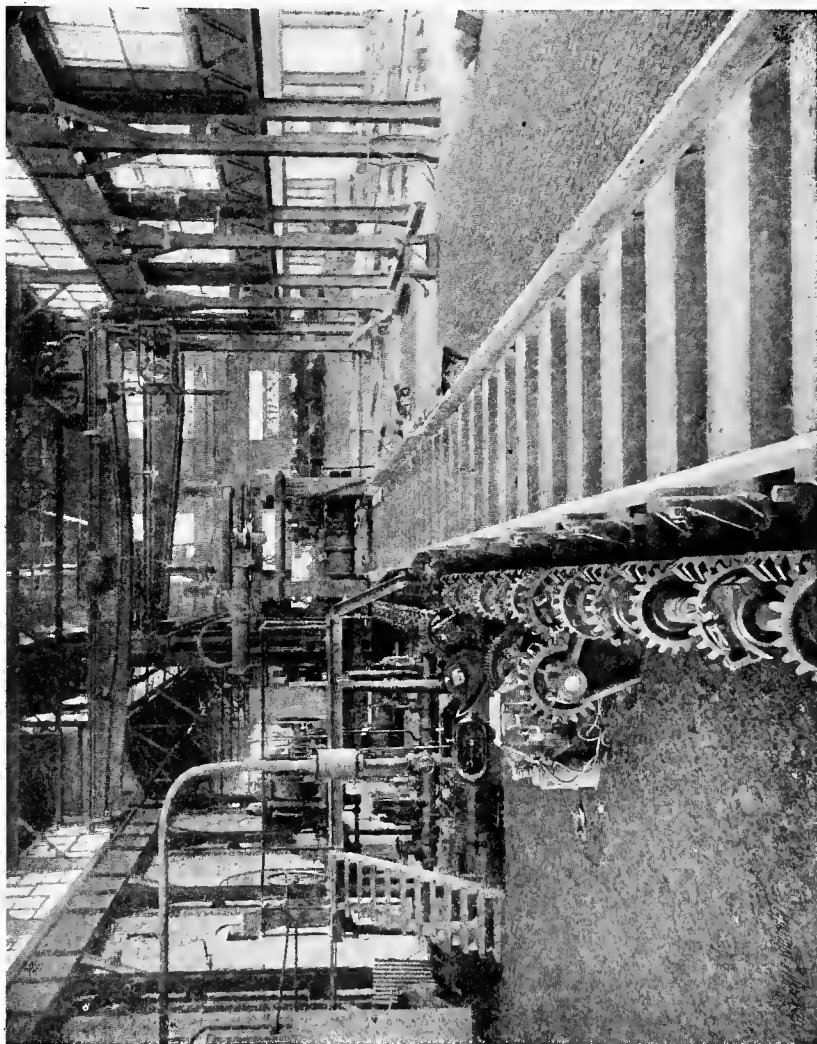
A 38-inch Blooming Mill and Tables installed by The United Engineering and Foundry Company.
